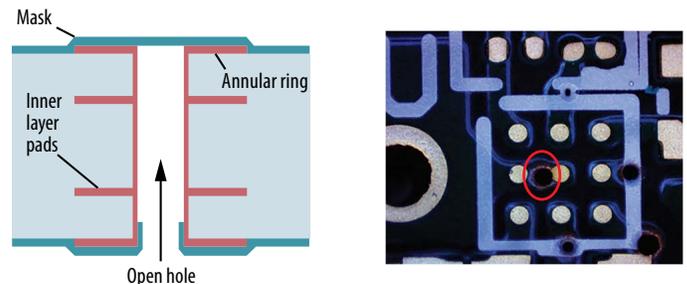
(a) Diagram of via with solder mask tent covering. (b) PCB showing uncovered via.
